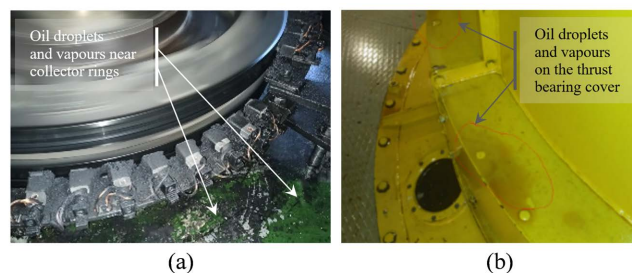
Oil droplets and vapours on equipment surfaces: (a) in the brush contact area, (b) on the bearing housing.
